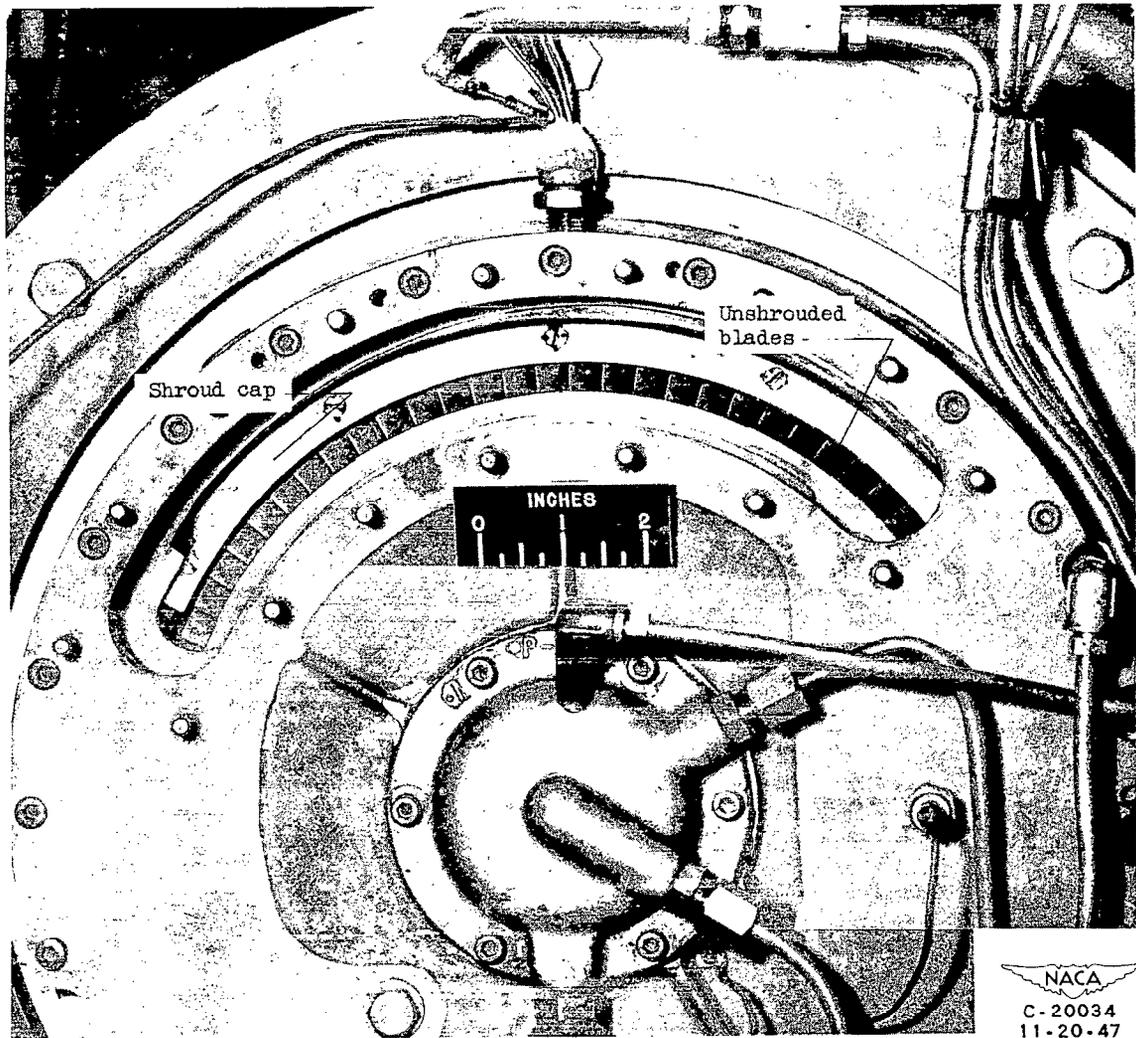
Front view of first-stage turbine of Mark 25 power plant with nozzle removed to show unshrouded 0.35-inch rotor blade and shroud cap.
